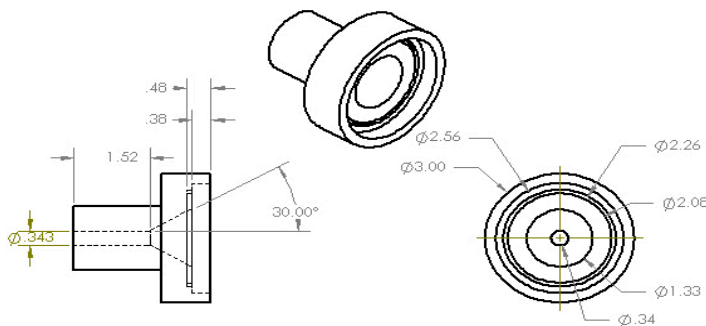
Drawing Sheet of the Nozzle. The drawing sheet was drawn and dimensioned in Solidworks.
